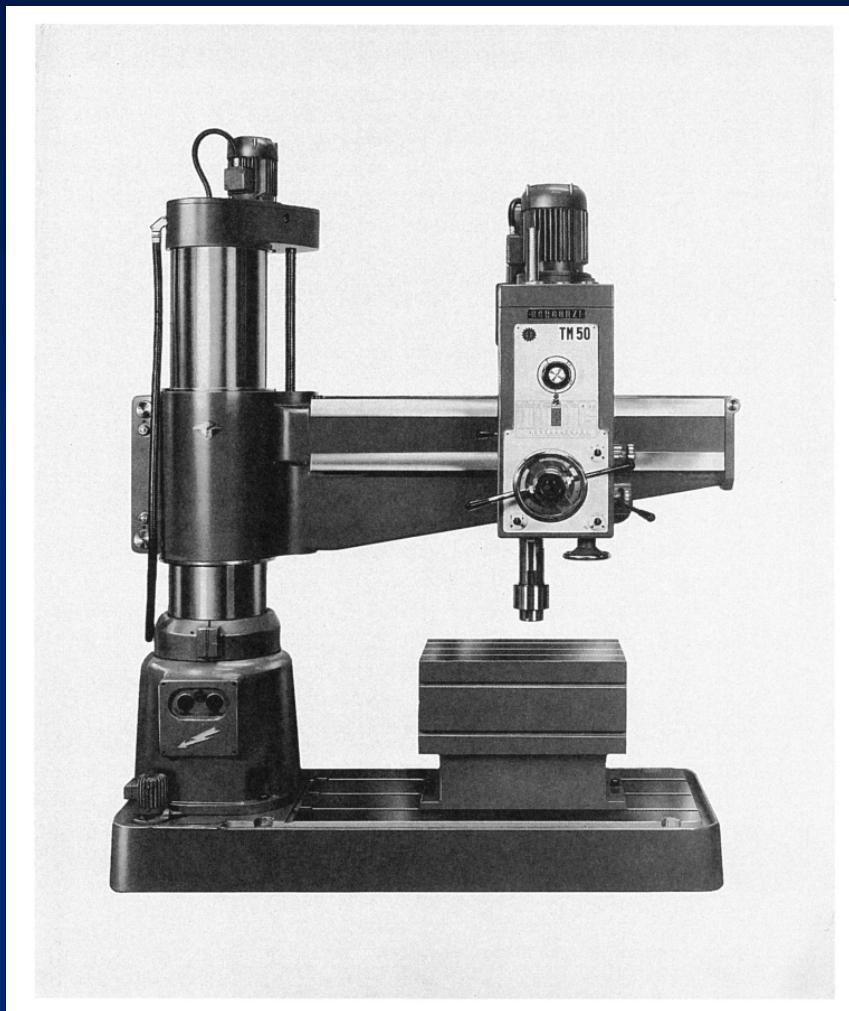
Radial drill press (Willis Machinery and Tools)
